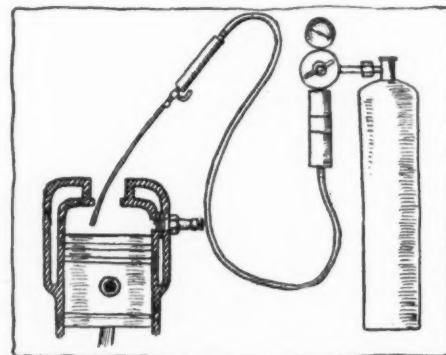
Oxy-Decarbonizer for burning carbon out of the cylinders. The method of operation is shown
